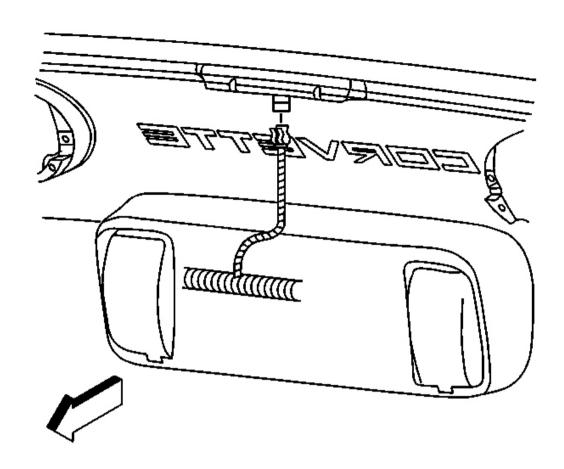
Electrical Connector To Stop Lamp Courtesy of GENERAL MOTORS CORP.
